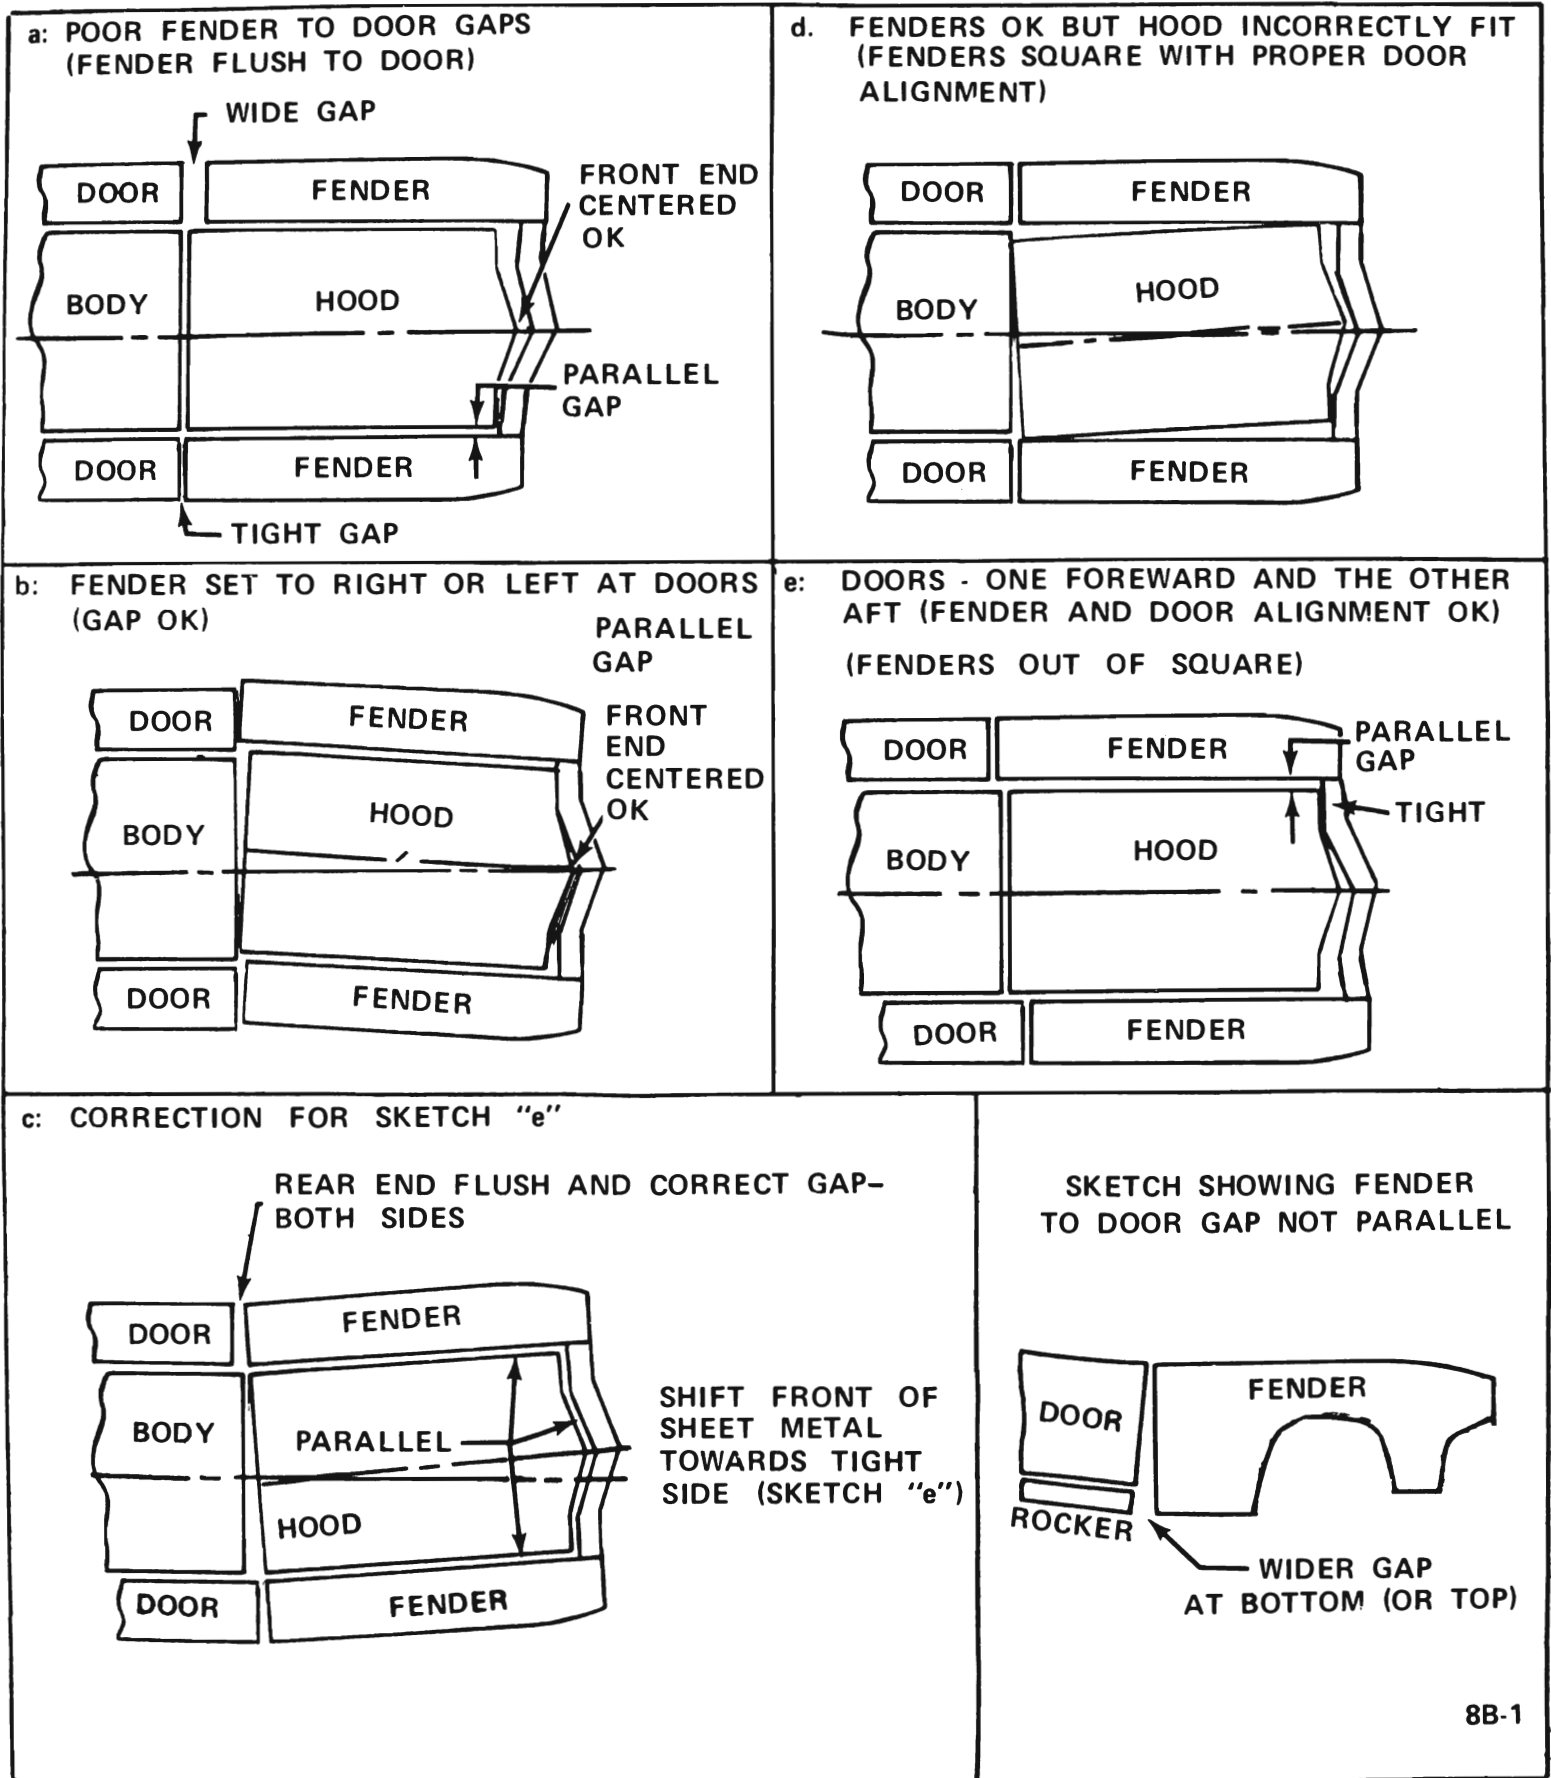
B-1 A-E Chassis Sheet Metal Alignment
